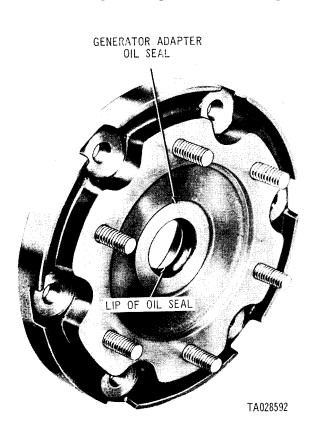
Removing generator adapter oil seal, model AVDS-1790-2D and AVDS-1790-2DR engines.
